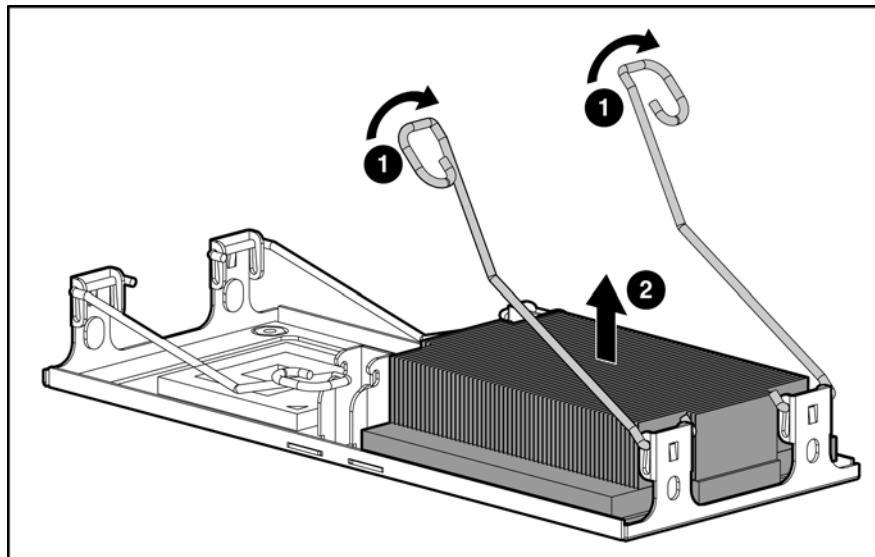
Unlatching the processor locking levers and removing the heatsink
